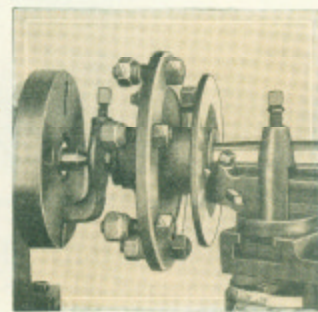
Truing a Hub Flange of a Rear Auto Wheel
